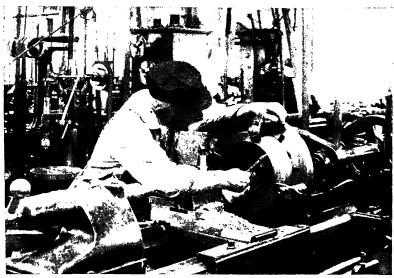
Inside micrometer. An inside micrometer caliper being used to measure the inside diameter shown. Such an inside caliper usually consists of a screw thread as shown in Fig. 284, but to accommodate this part to a variety of inside diameters an extension is placed on the end of the frame. Thus one screw does for a variety of sizes. Note the method of holding work on the faceplate. This cutting of an inside diameter would be classified as boring. (Brown and Sharpe.)
